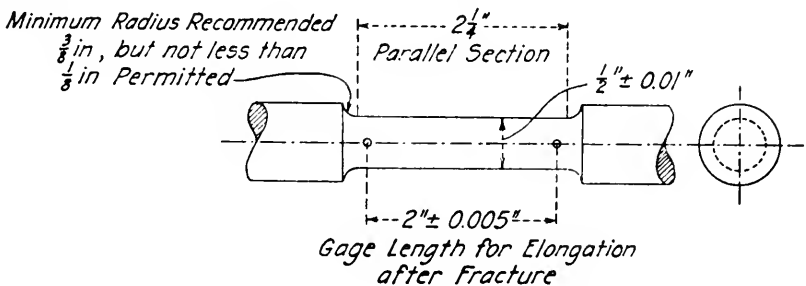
Standard round tension test specimen with 2-in. gage length.
